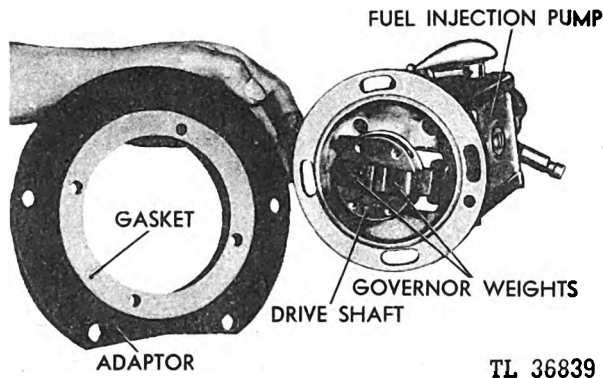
Assembling Adaptor Plate to Fuel Pump
